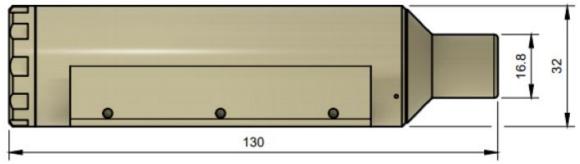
Dimensions WL-21018 Locator-U1 (dimentions are given in mm)
